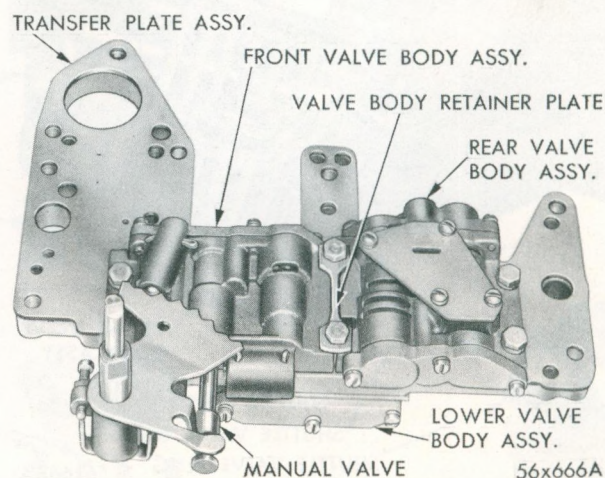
Valve Bodies and Transfer Plate Assembly (Bottom View)
